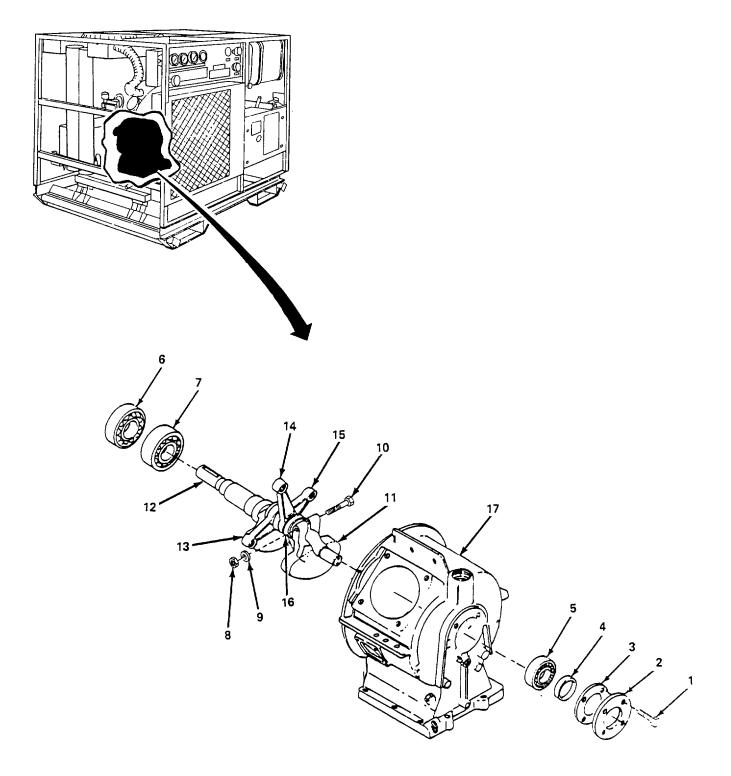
Compressor Crankshaft Assembly, Replace.
